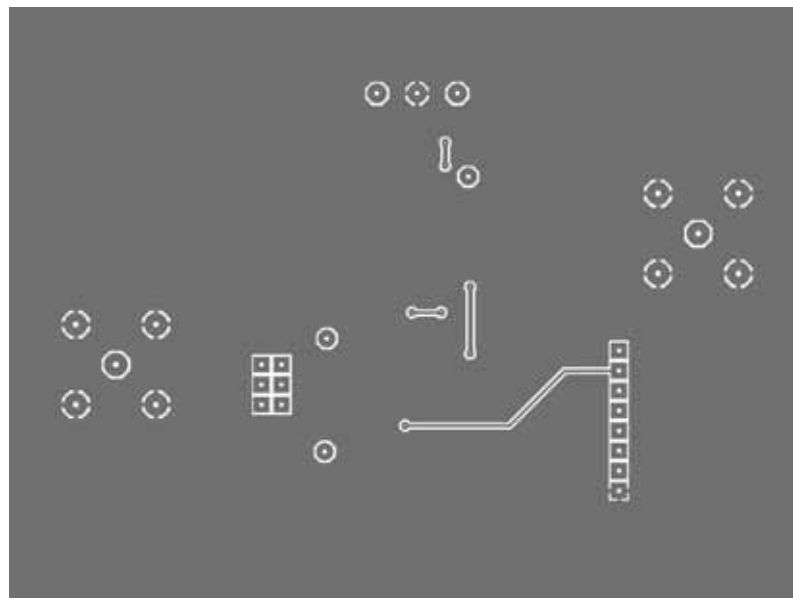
Evaluation circuit layout: Bottom side (viewed through board)
